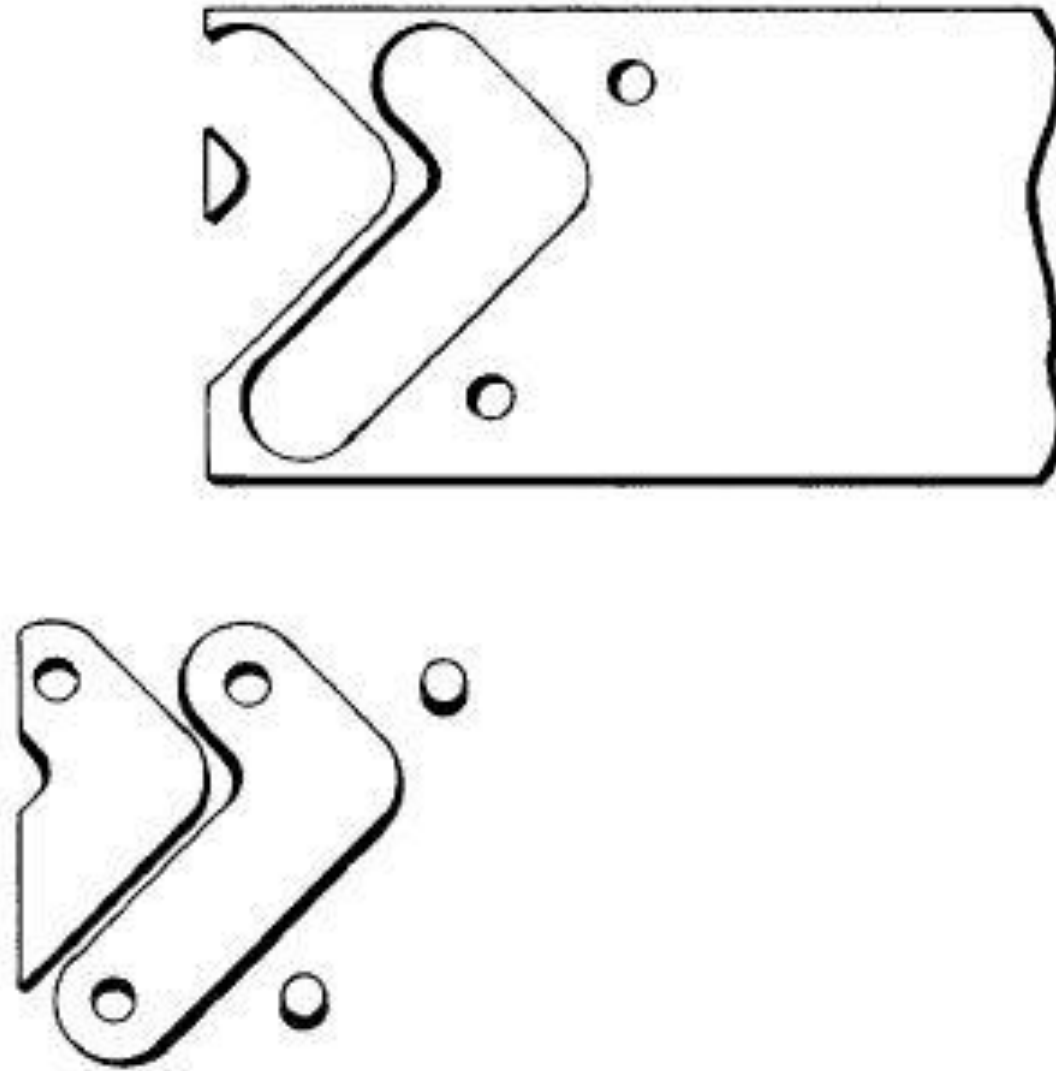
The resulting scrap strip and parts removed in testing the third layout.
